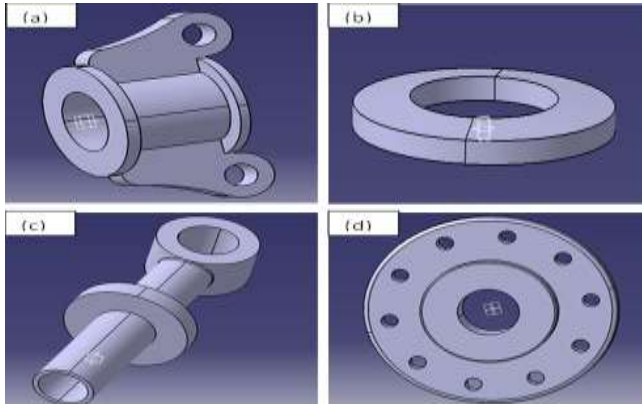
Shock absorber components (a) Cylinder (b) Flange (c) Eye ball (d) Mounted plate
